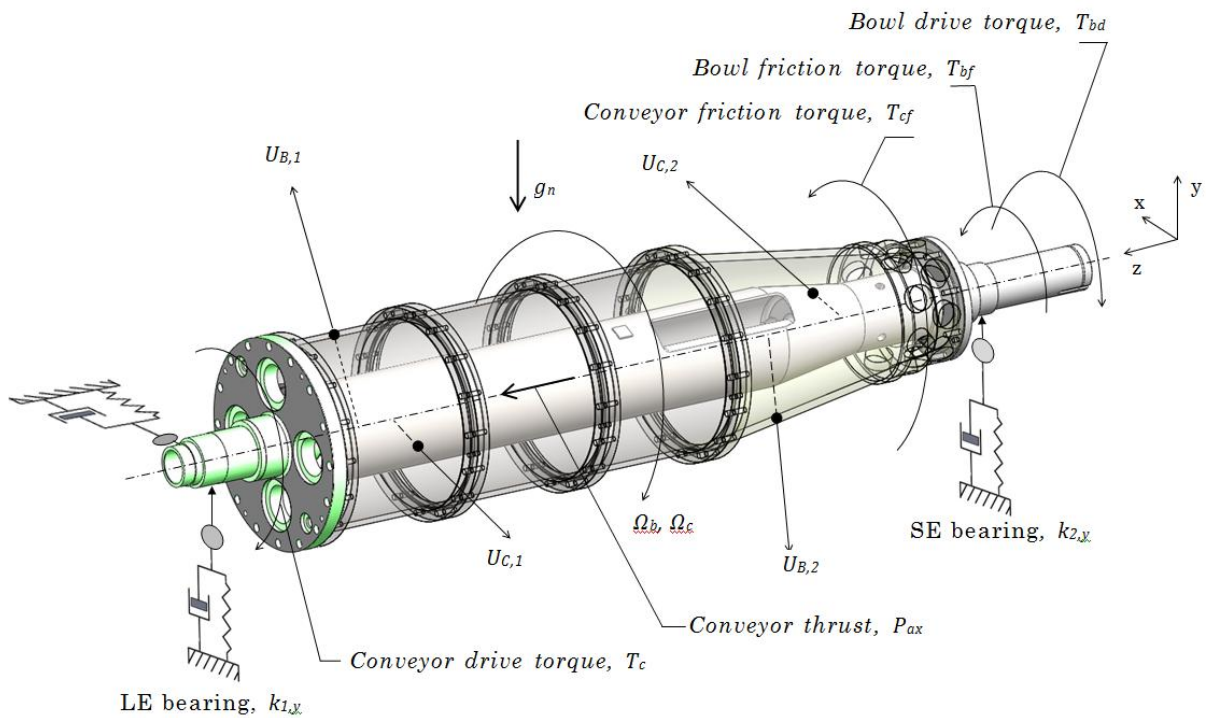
Two rotor assembly – auger shown without flights for clarity
